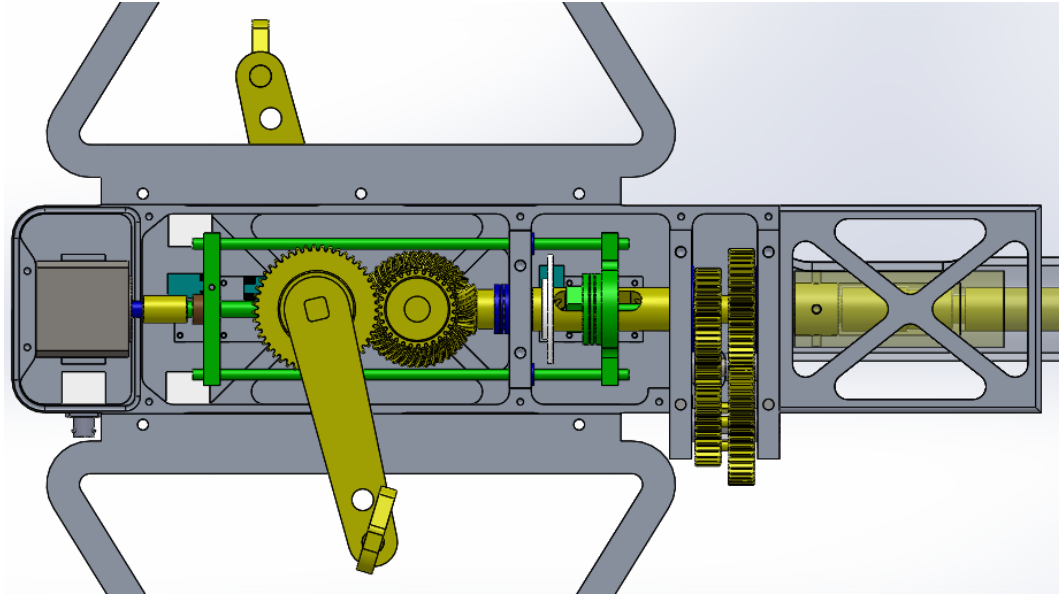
The control assembly is comprised of the green and teal components, associated bushings and bearings, motor (dark grey), and the shaft connector (yellow) that transfers torque from the motor to the lead screw.
